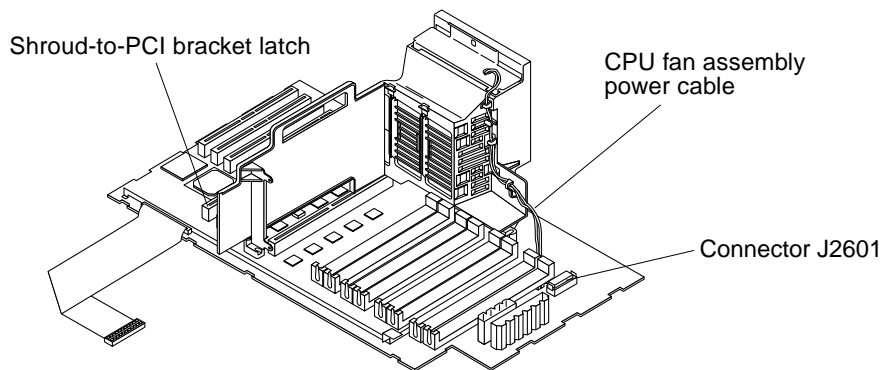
Removing and Replacing the One-Piece Shroud Assembly (Part 1 of 2)
